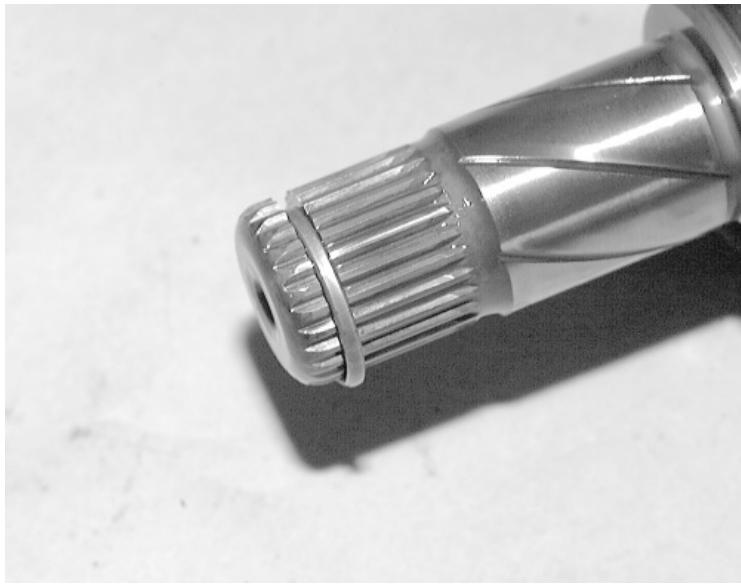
the halfshaft retaining ring on the spline shaft
